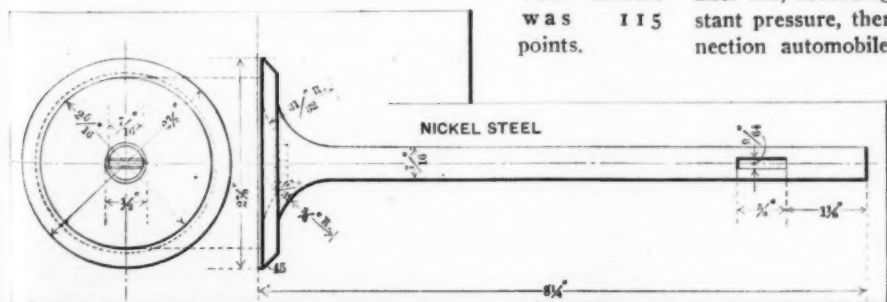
Valve of big diameter, so shaped that it will not warp in the heat of the exhaust.
